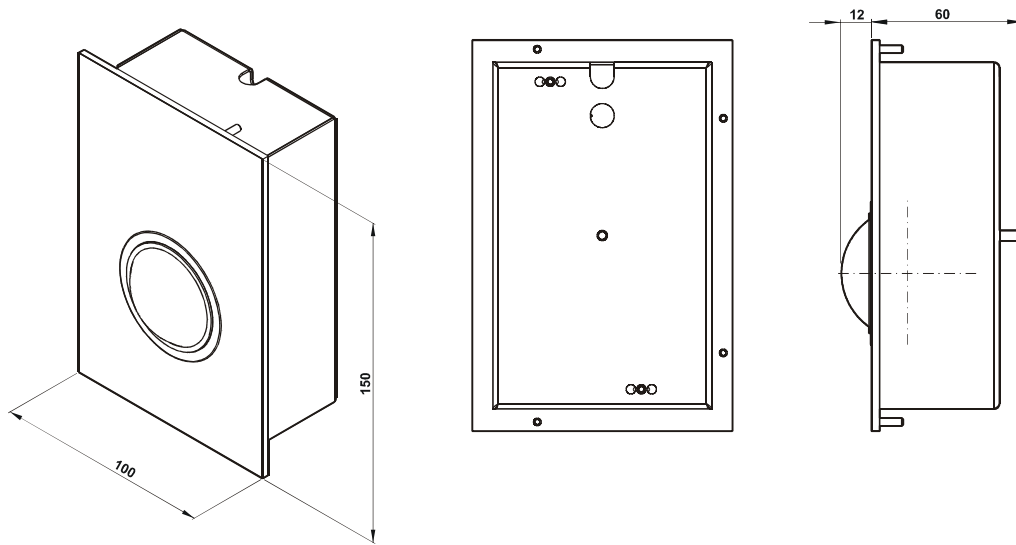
Transas ES4 dedicated keyboard. Dimensional drawing of Trackball
